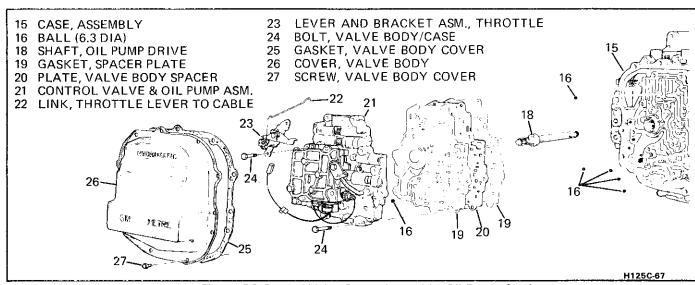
Control Valve Pump Assembly, Oil Pump Shaft
